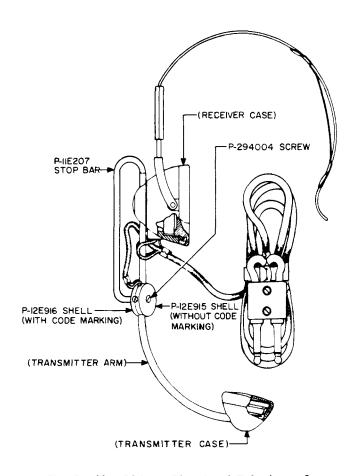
No. 52A or 52B Head Telephone Set Equipped With a Stop Bar
